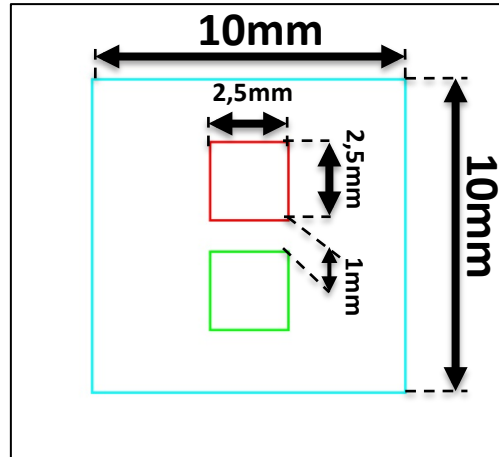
Layout with dimensions of the geometry used to realize simple doubly clamped beam by laser-cut.
